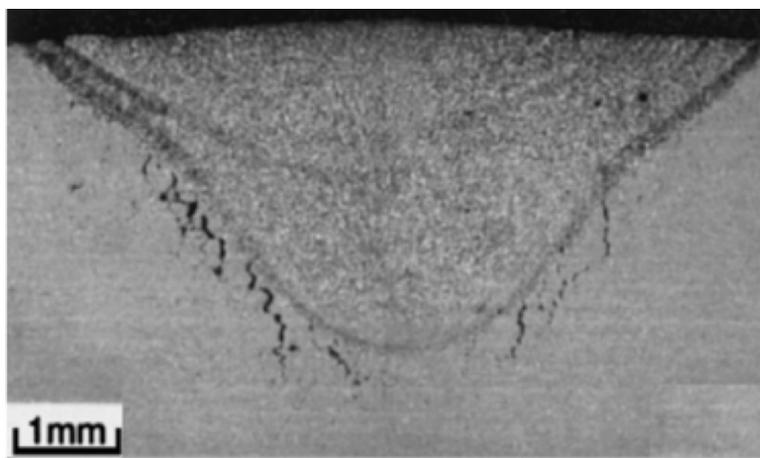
Irradiated material heat-affected zone cracking after regular fusion repair welding (Asano et al., 1999).
